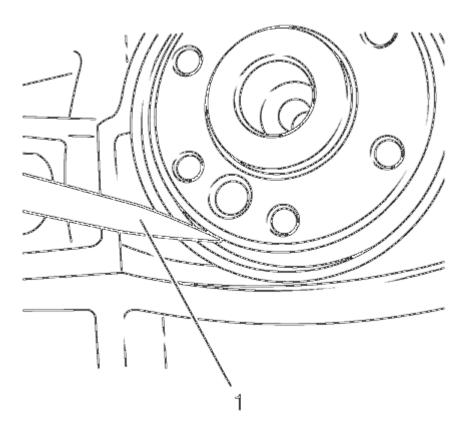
Compressing Timing Chain Tensioner Courtesy of GENERAL MOTORS COMPANY
